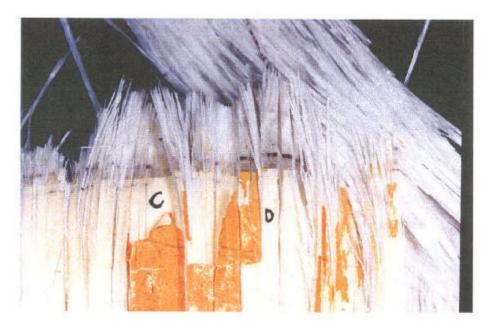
Appearance of Failed Circumferential Fibers at Initial Failure Site (Letters refer to Test Specimen Locations)
